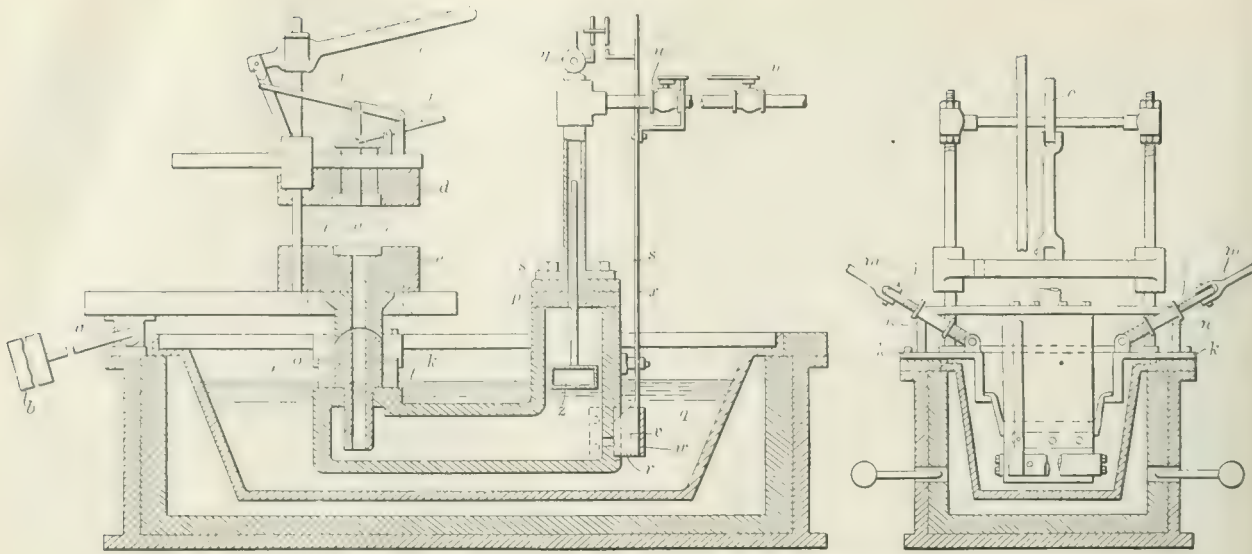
A Machine Operated by Air Pressure with a Tilting Table for the Molds.
